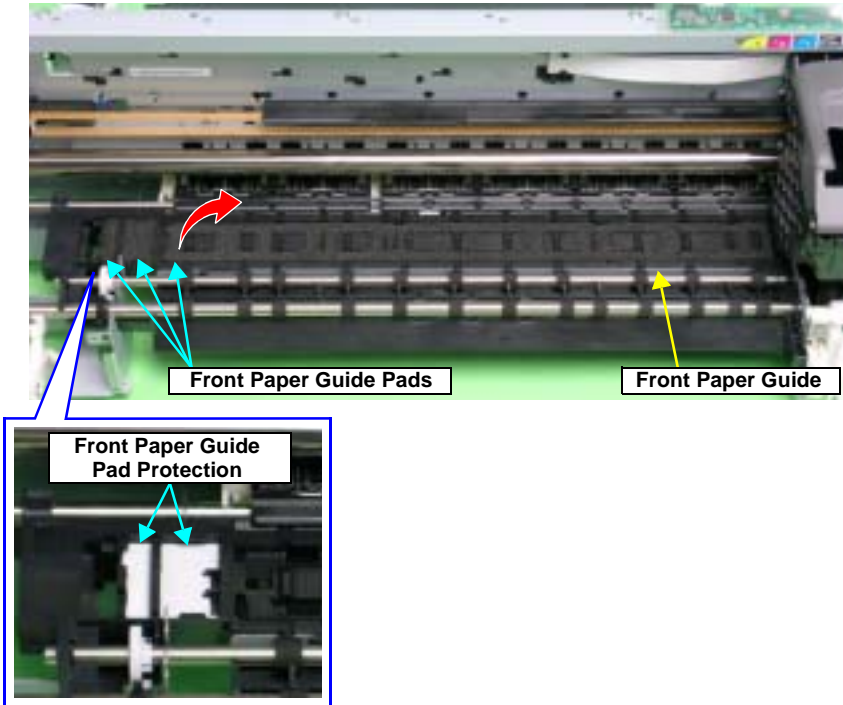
Removing the Front Paper Guide Pads and the Front Paper Guide Pad Protection
